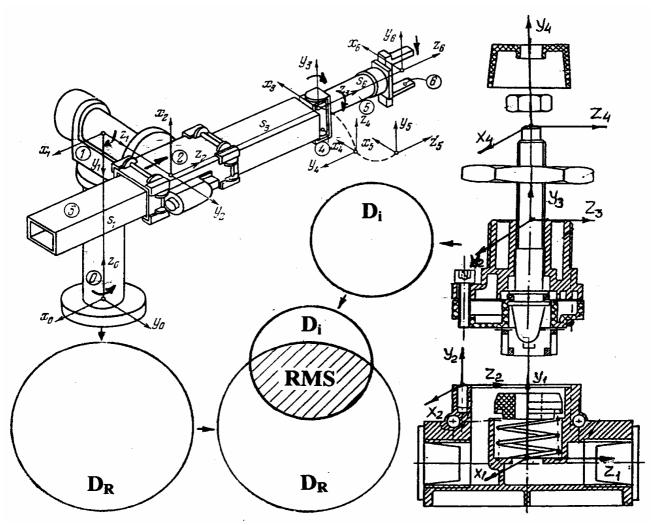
Shaping of a set assembly movements of the robot and assembly unit.
